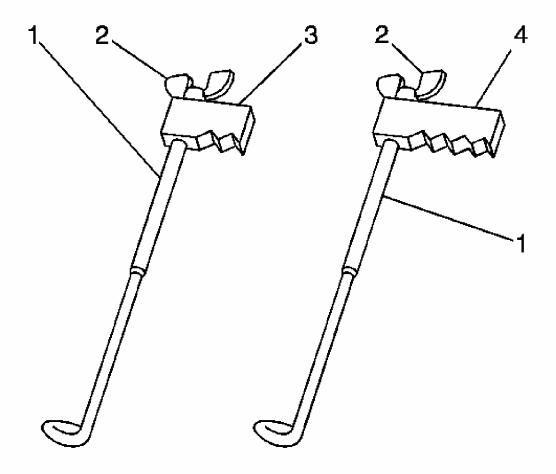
Identifying Timing Chain Retention Tool Components Courtesy of GENERAL MOTORS CORP.
